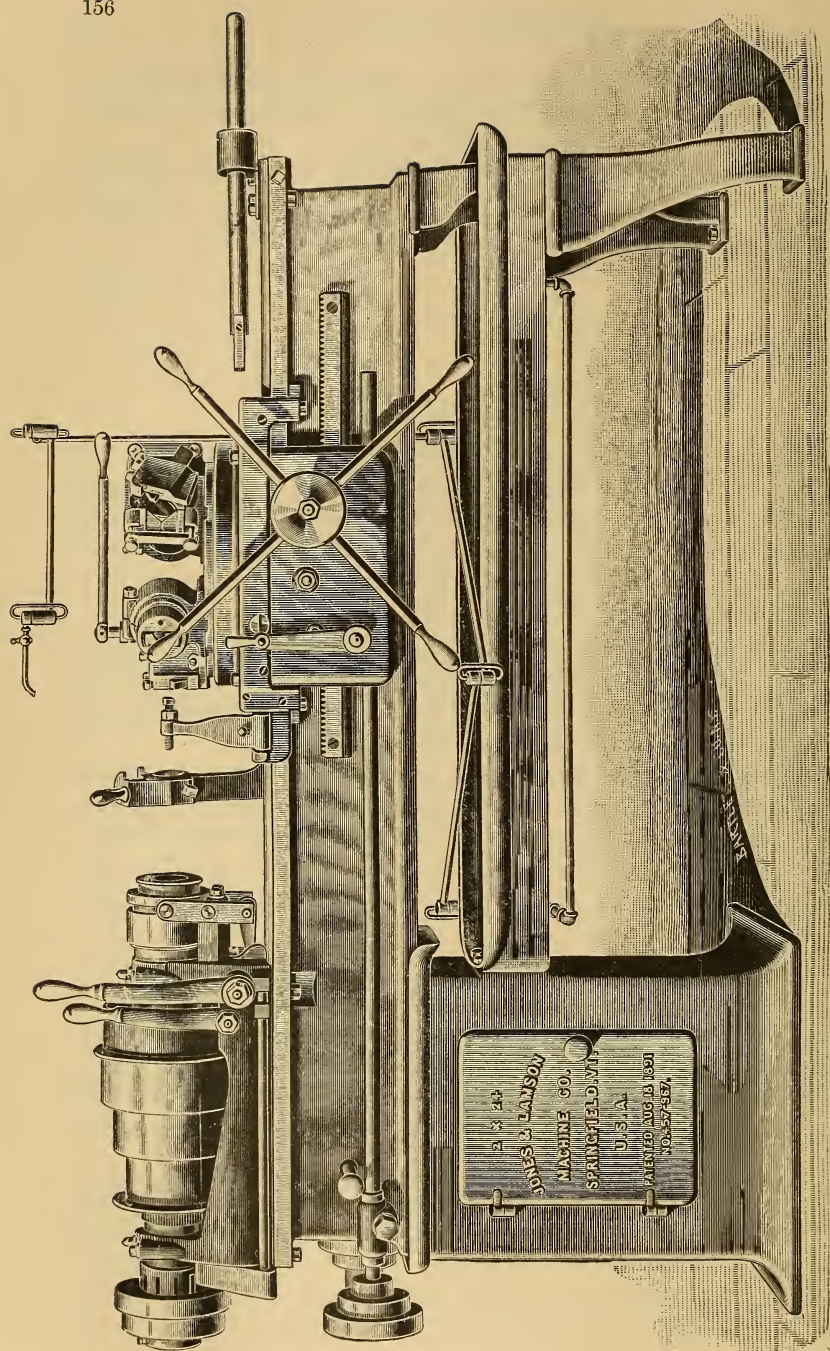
IMPROVED TURRET LATHE.—JONES & LAMSON MACHINE CO., SPRINGFIELD, VERMONT.
